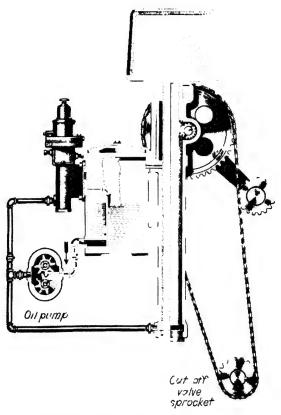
Diagram showing governor operation on Ingersoll-Rand XPV compressor.
